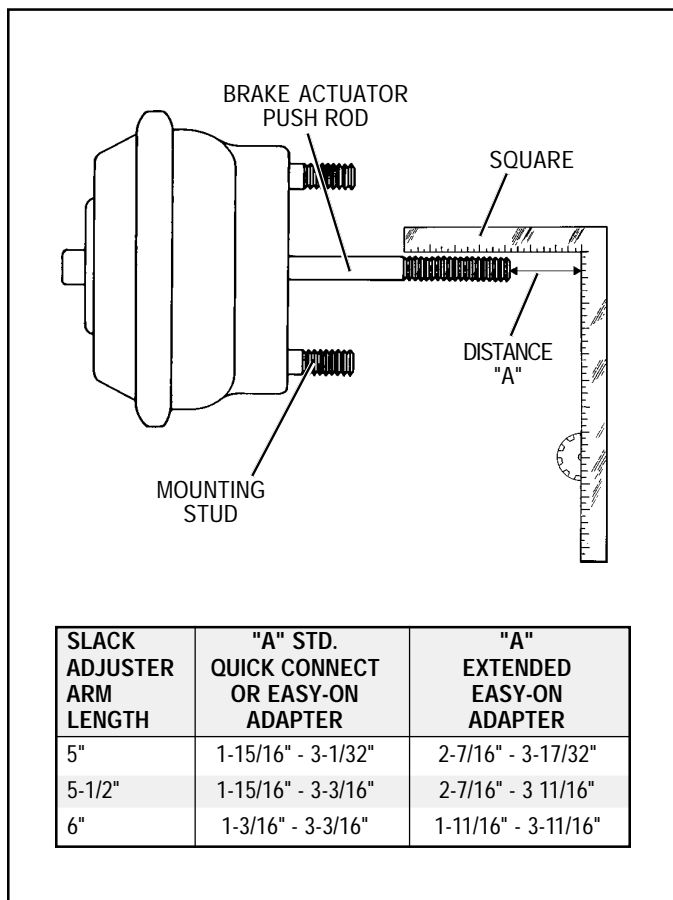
MEASURING THE BRAKE ACTUATOR PUSH ROD
